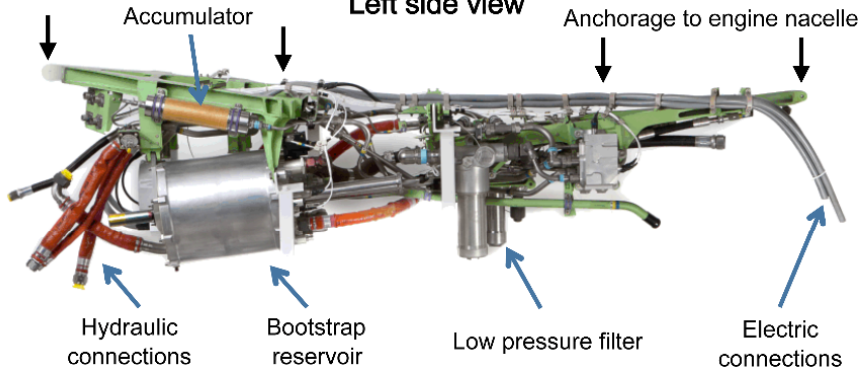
Main rotor hydraulic subassembly (MHR) of Bell 429
